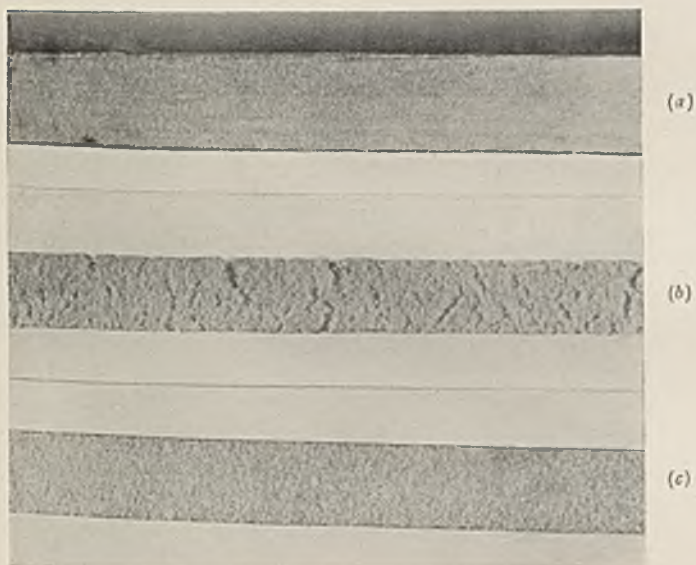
Edge of Fractured Specimens. (a) 5% Bi, Fractured in Tensile Test; (b) 5% Bi, Fractured in Creep Test; (c) 3% Bi, Fractured in Creep Test.
